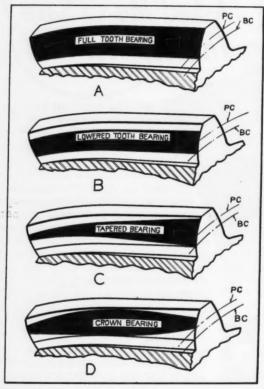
Sections of four helical gear teeth showing different kinds of tooth bearings.
